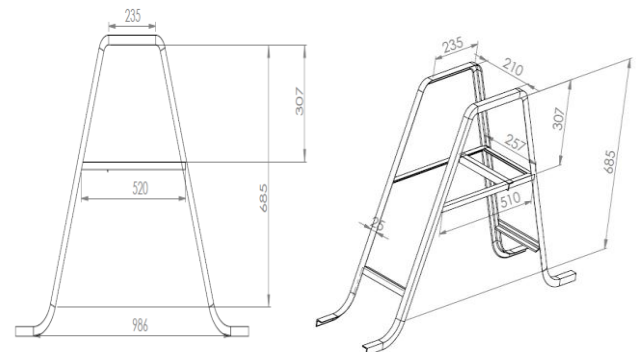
Developed inverted trapezoidal frame in laboratory (all dimensions in mm)
